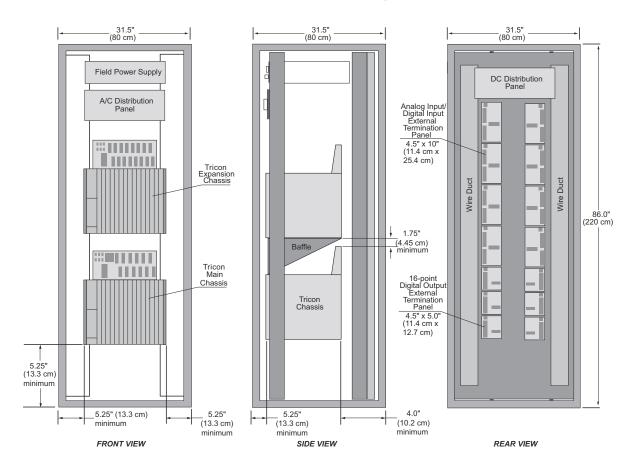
Typical Dimensions and Clearances for Chassis Installation with External Termination Panels
